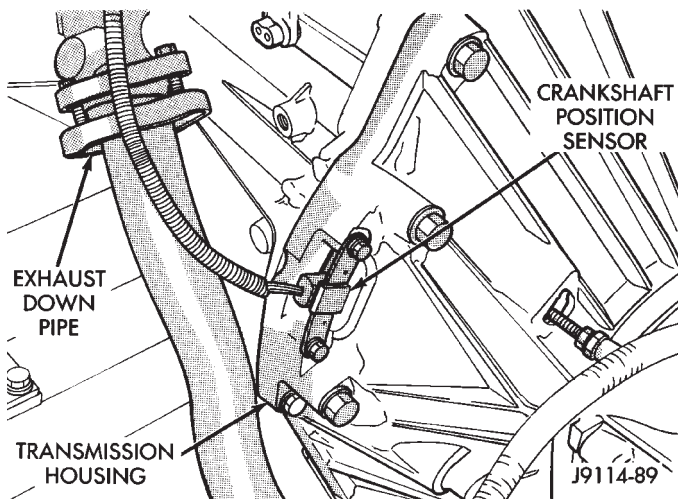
Crankshaft Position Sensor—2.5L 4-Cylinder Engine—Typical
